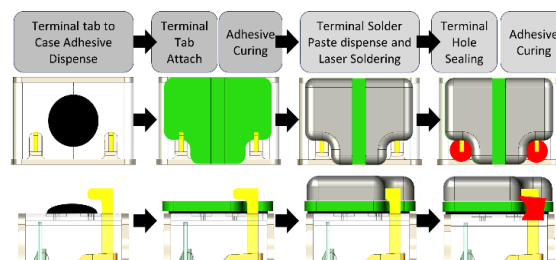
Process Flow with emphasis on the terminal tab to case assembly, soldering, and terminal hole sealing.
